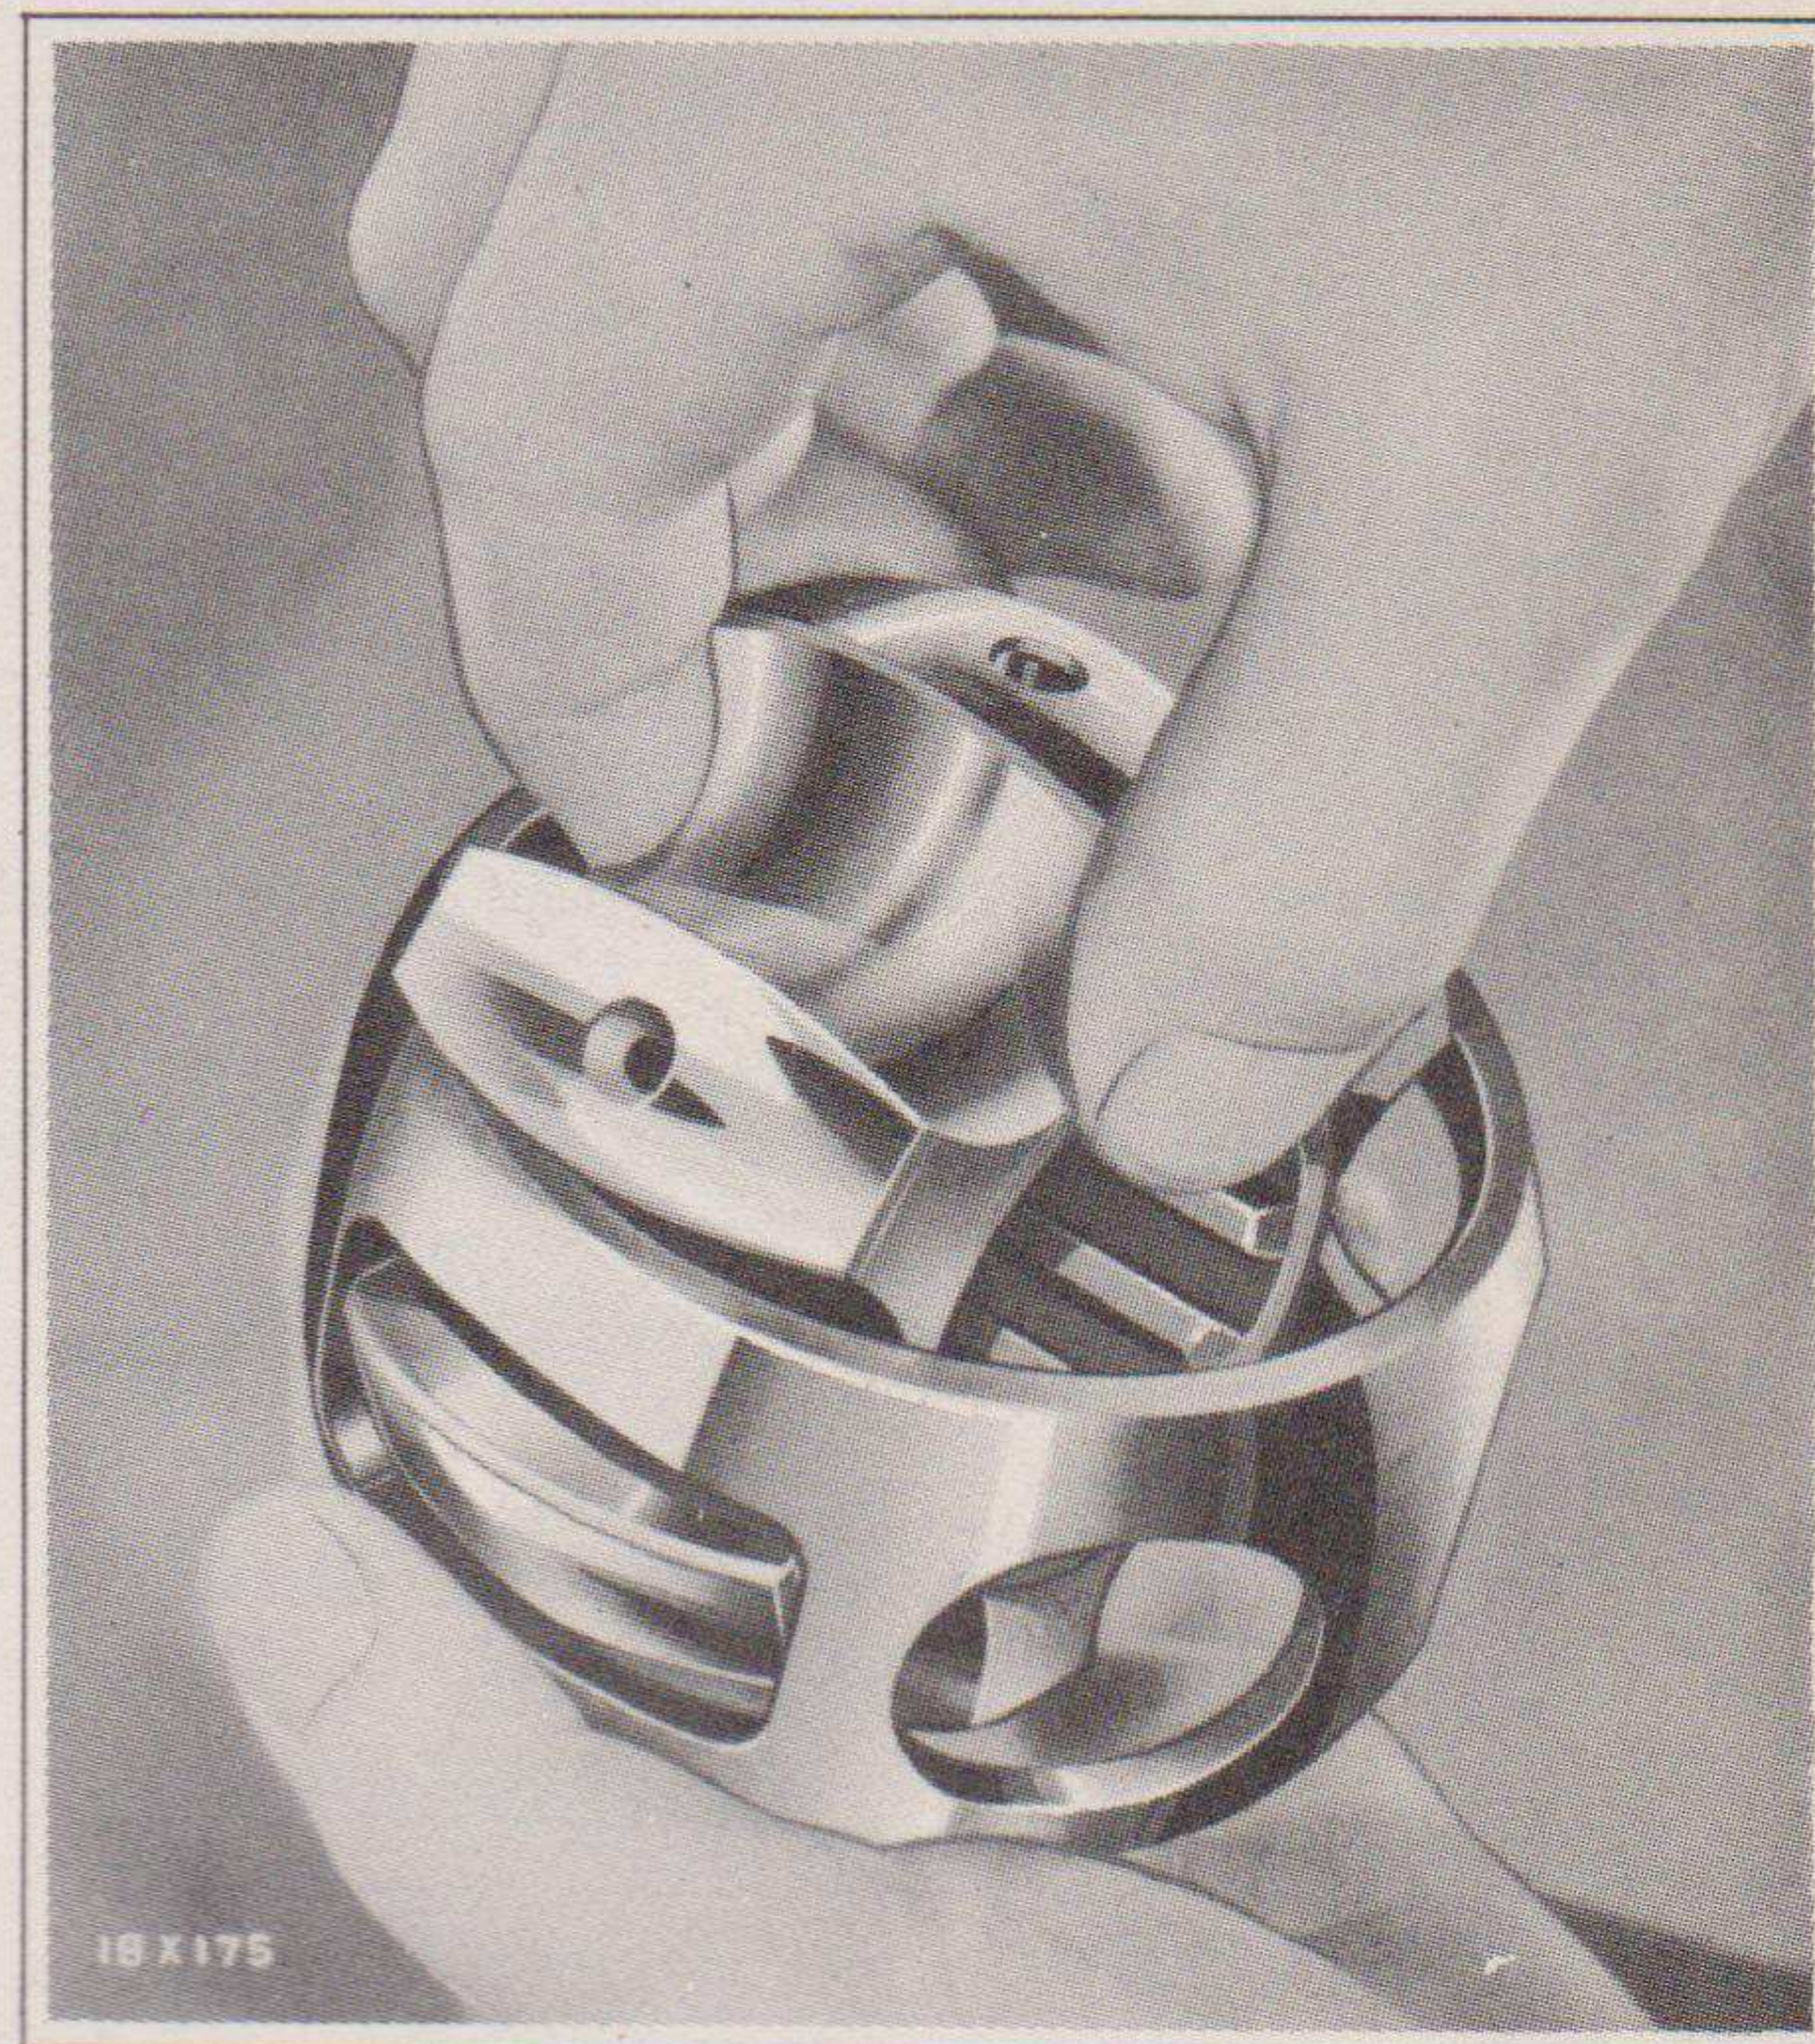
Removing Universal Drive Inner Race from Ball Cage (Rzeppa)
